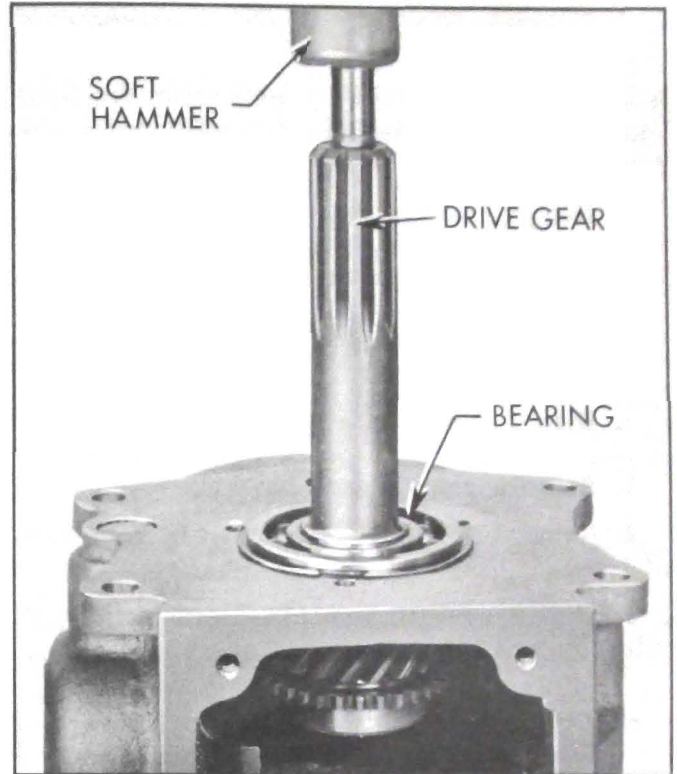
Removing Main Shaft or Drive Gear Bearing
